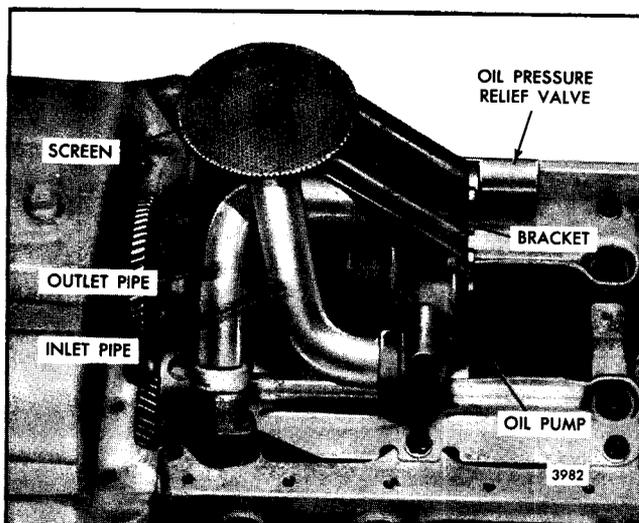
Lubricating Oil Pump Mounting (8V Engine)
